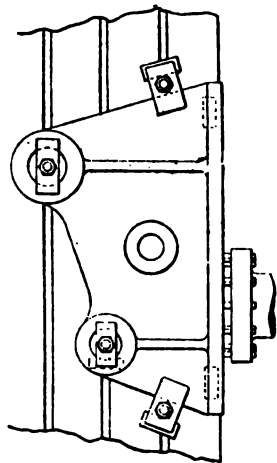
Two Bearings, set Back to Back, being faced with a Rotary End Cutter.
